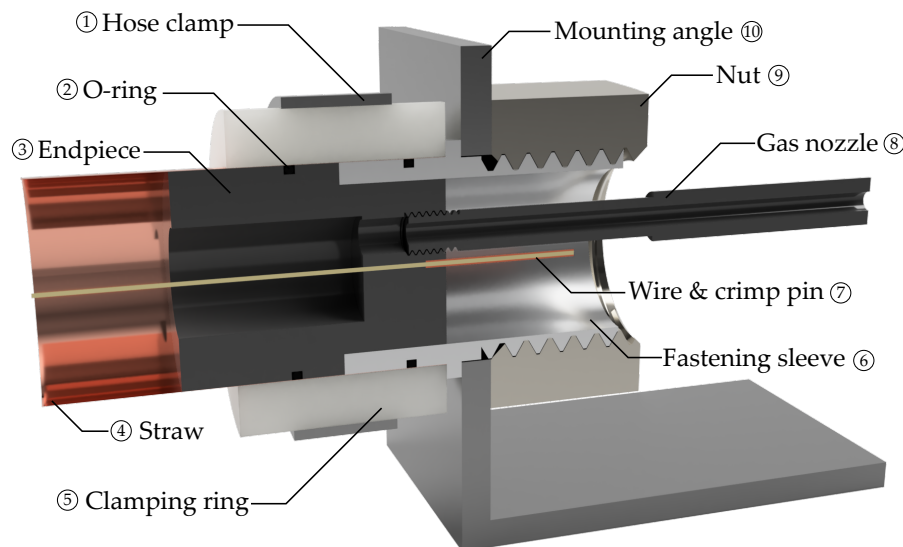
A cut through the mounting hardware of the single-straw functional model. A clamping ring distributes the force of a hose clamp to press a straw tube onto a straw endpiece and a fastening sleeve. Using a nut the fastening sleeve is attached to a mounting angle. A gas nozzle is used to supply the straw with gas. The anode wire is held in using a crimp pin.
